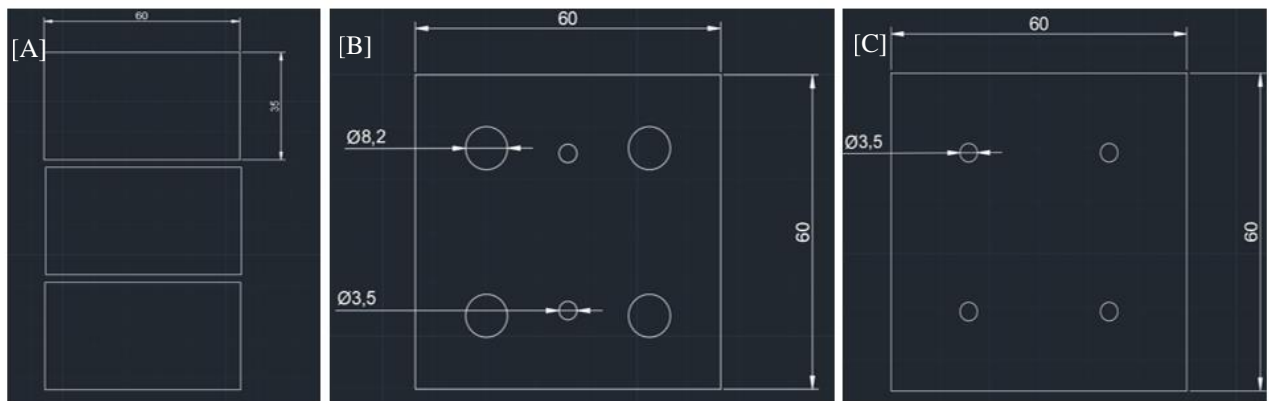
AutoCAD modelling of [A] elevations, [B] base, [C] top part of aluminium component
